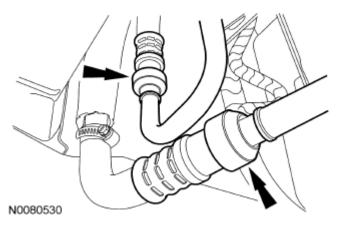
Locating Transaxle Fluid Cooler Tubes Courtesy of FORD MOTOR CO.
